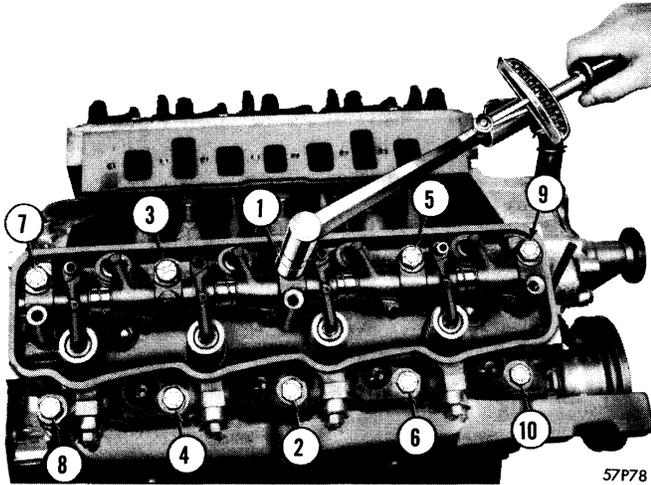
Sequence for Tightening Cylinder Head—V-8 Engine—277, 301 and 318 Cubic Inch Engine
